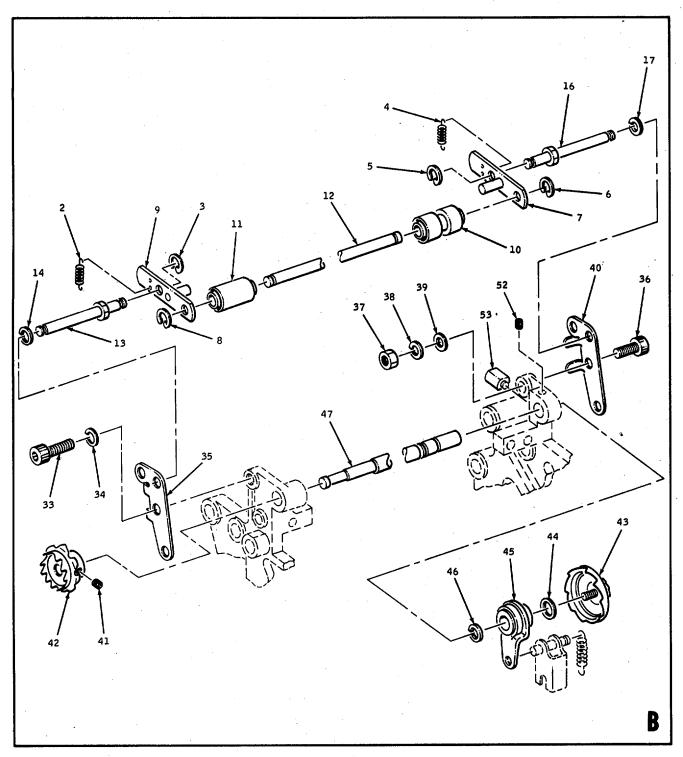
Right and Left Ribbon Feed and Low Paper Sensing Mechanisms, Exploded View (Sheet 2 of 3)
